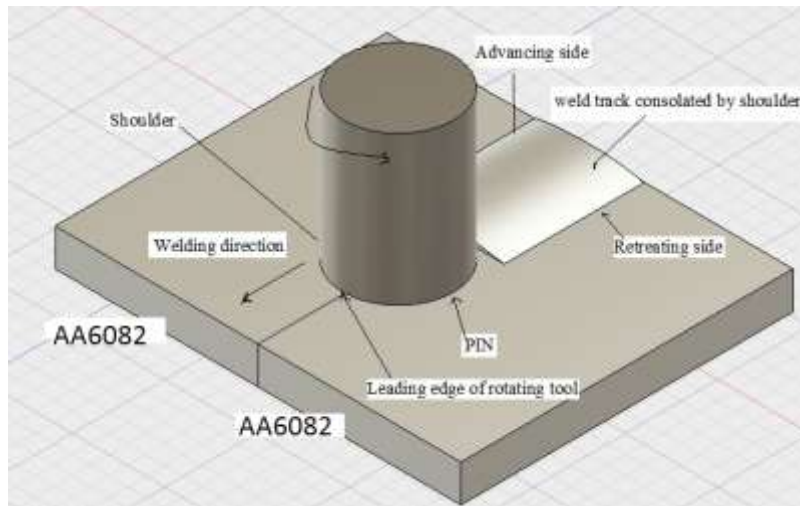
Schematic Diagram of Friction Stir Welding
